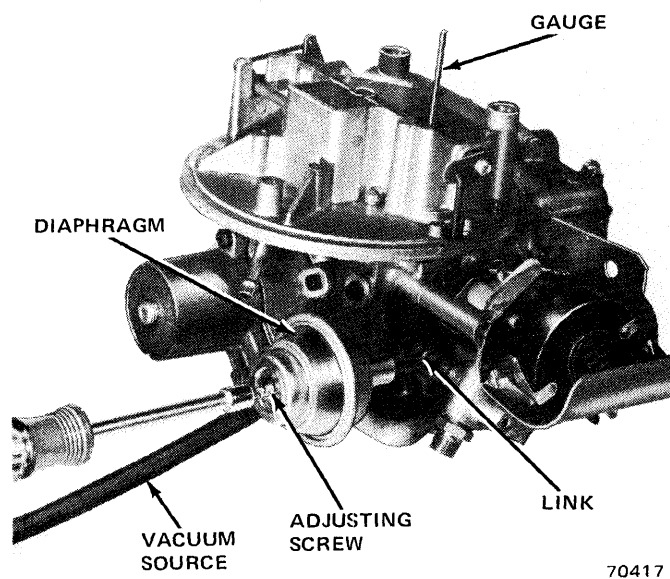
Initial Choke Valve Clearance Adjustment
